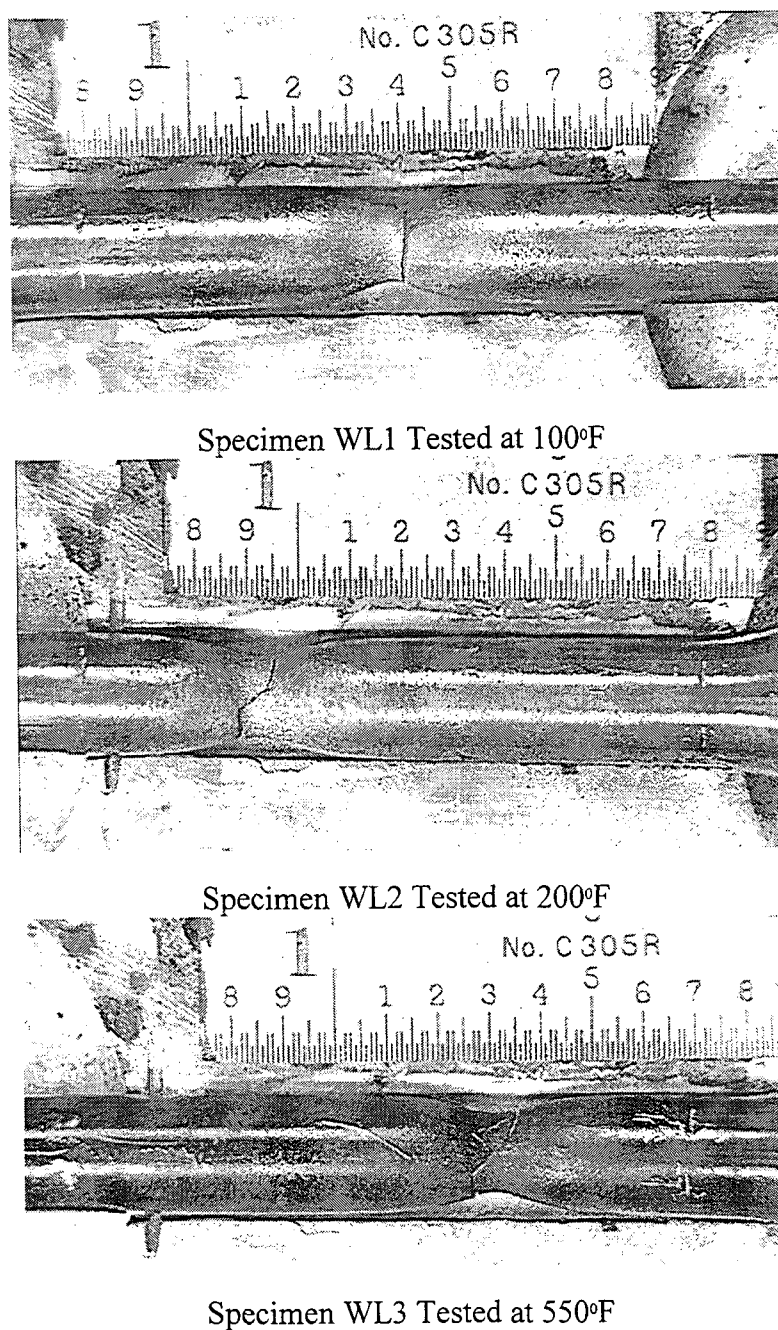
Fractured Tensile Specimens from Watts Bar Unit 1 Reactor Vessel Intermediate Shell Forging 05 (Tangential Orientation)
